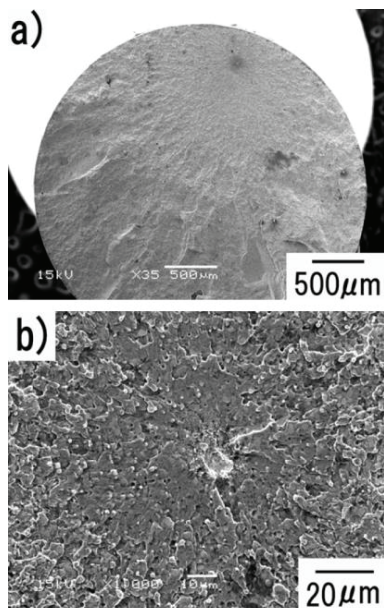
Fatigue fracture surface of plane specimen.
